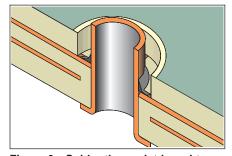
Solder the eyelet barrel to the exposed inner layer.
